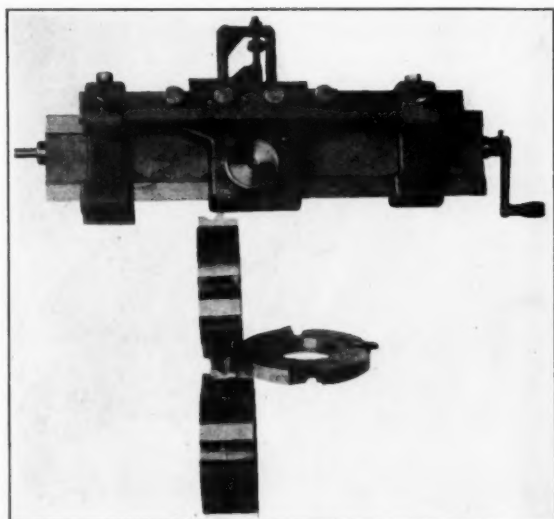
TOP PROFILE-TRUING DEVICE ON MOLDER. TOP, SIDE, AND BOTTOM FOUR-KNIFE DISK HEADS SET UP TO MAKE MOLDING
